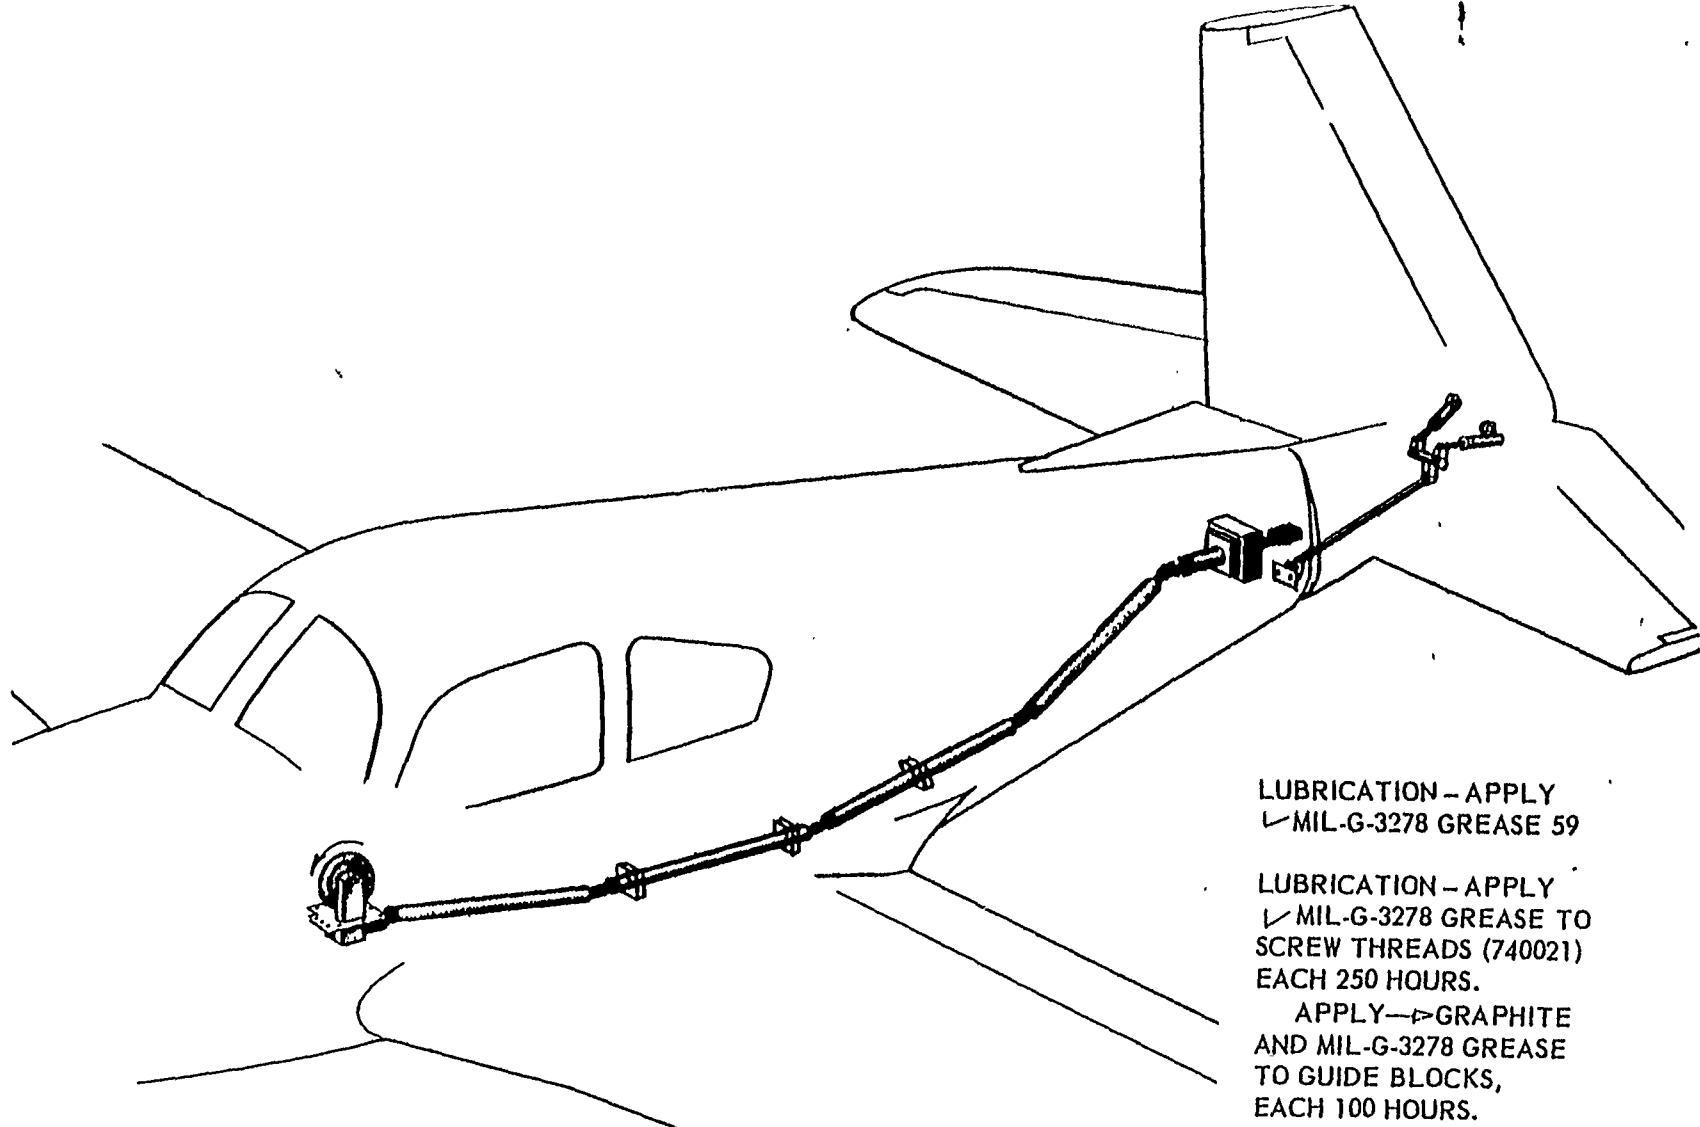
TRIM CONTROL ACTUATOR ASSEMBLY
